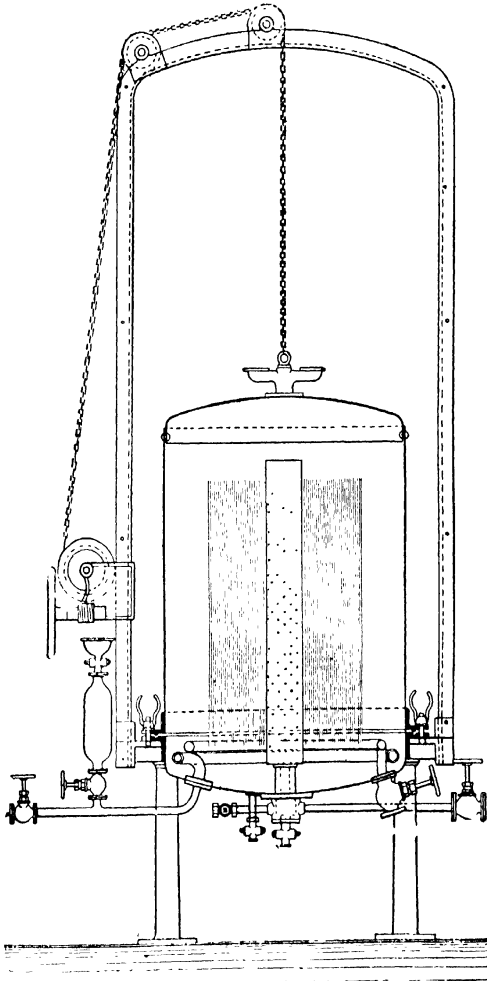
Steaming Apparatus for Silk-wool Pieces.
